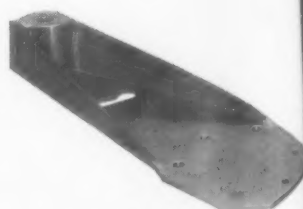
Finished weldment costs 25% less ... eliminates former breakage experienced in casting. Steel hub cut from bar stock and pre-drilled, is welded to simple formed steel arm in which holes are pre-punched.
